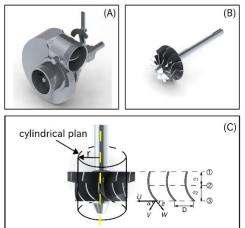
Turbine Indalma. (A) Isometric view of the turbine with the intake valve with maximum opening, (B) rotor inner detail, (C) cylindrical cut in the rotor to highlight the profile of the blades and the velocity profile.
